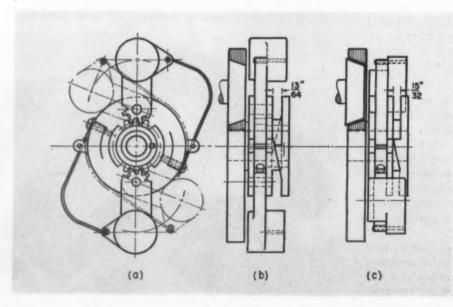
Above—Two-speed transmission shown in direct-drive position with cone brakes and spool gears locked
